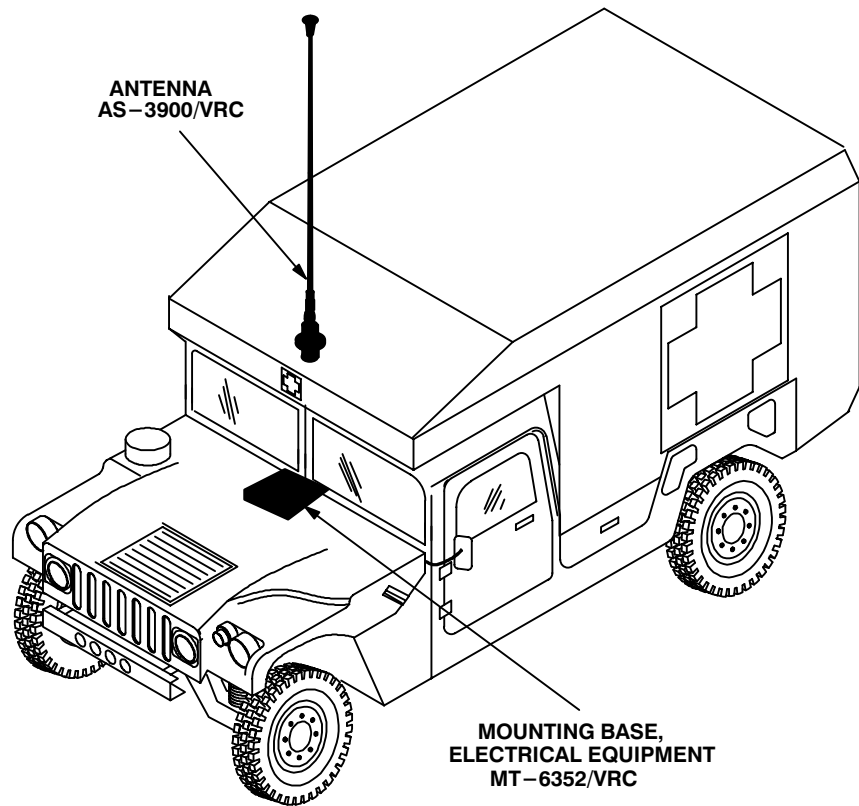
(2). MK and Radio Installation: MK Equipment Locations
